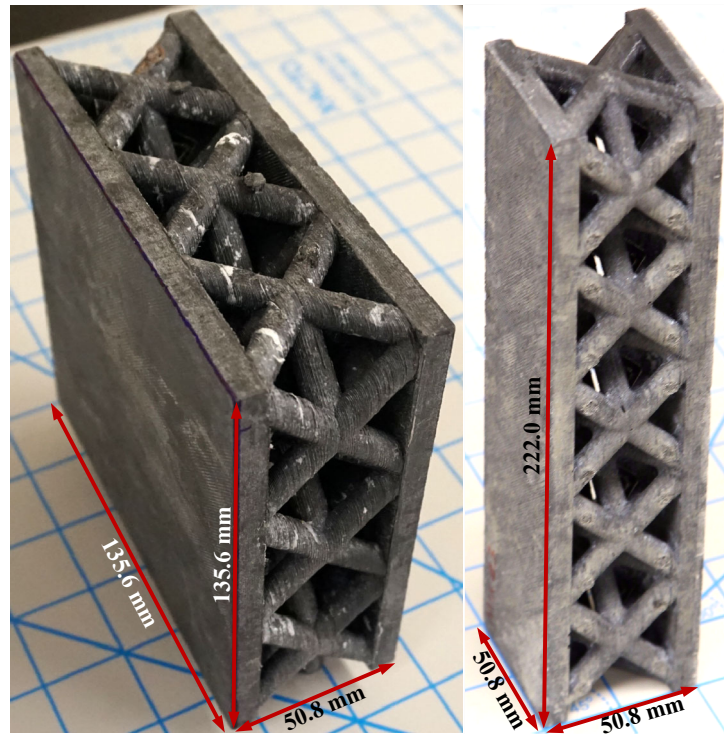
(a) 3×3×1-cell OTEC panel showing surface defect-free production and (b) 5×1×1-cell OTEC flexural material specimen.
